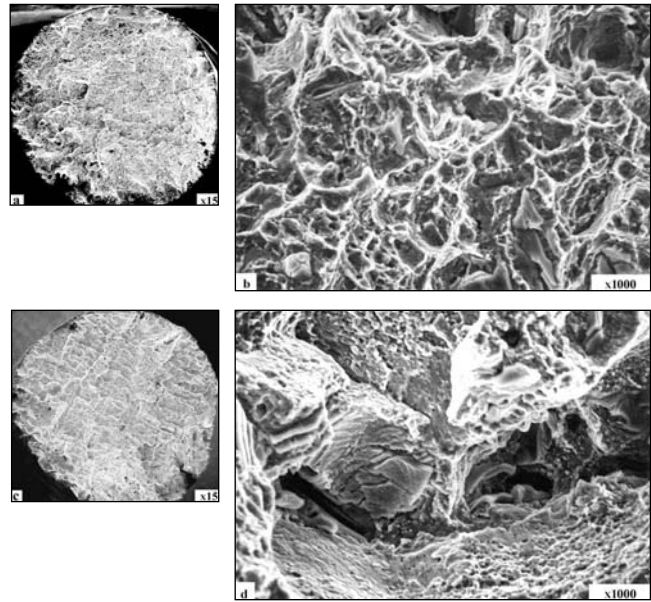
SEM Micrographs of the Fracture Surfaces of Rejuvenated and Aged Blade 4 Stress-Rupture Test Specimens. ((a, b) Shank specimen; (c, d) Airfoil specimen. Arrowheads indicate grain-boundary cavities (d).)
